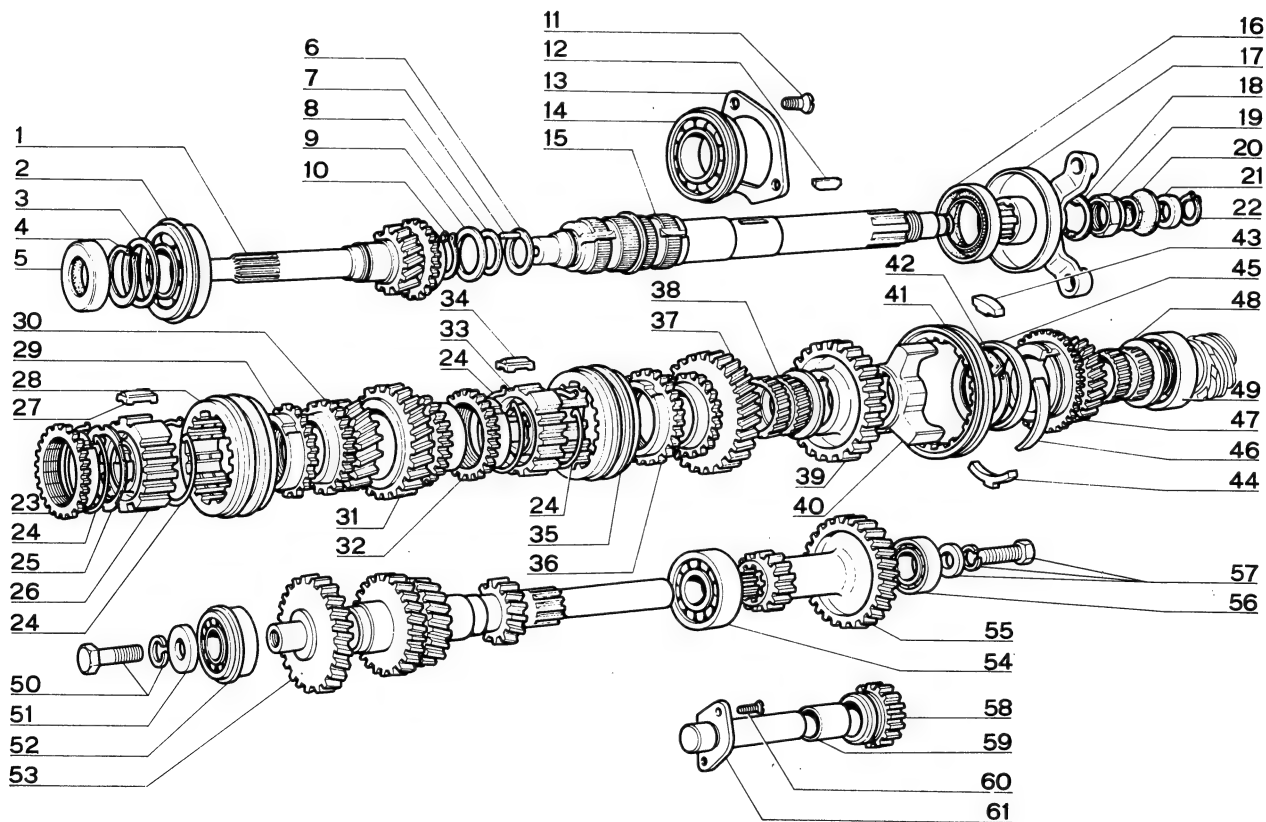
1500 and 1600 S Cabriolet transmission components.
